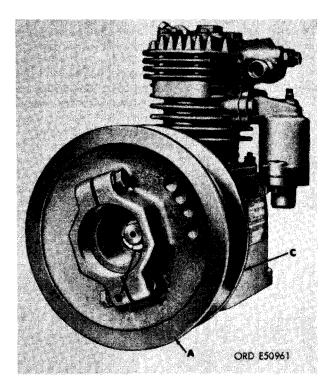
REMOVING OR INSTALLING AIR COMPRESSOR ADJUSTING FLANGE AND PULLEY.
